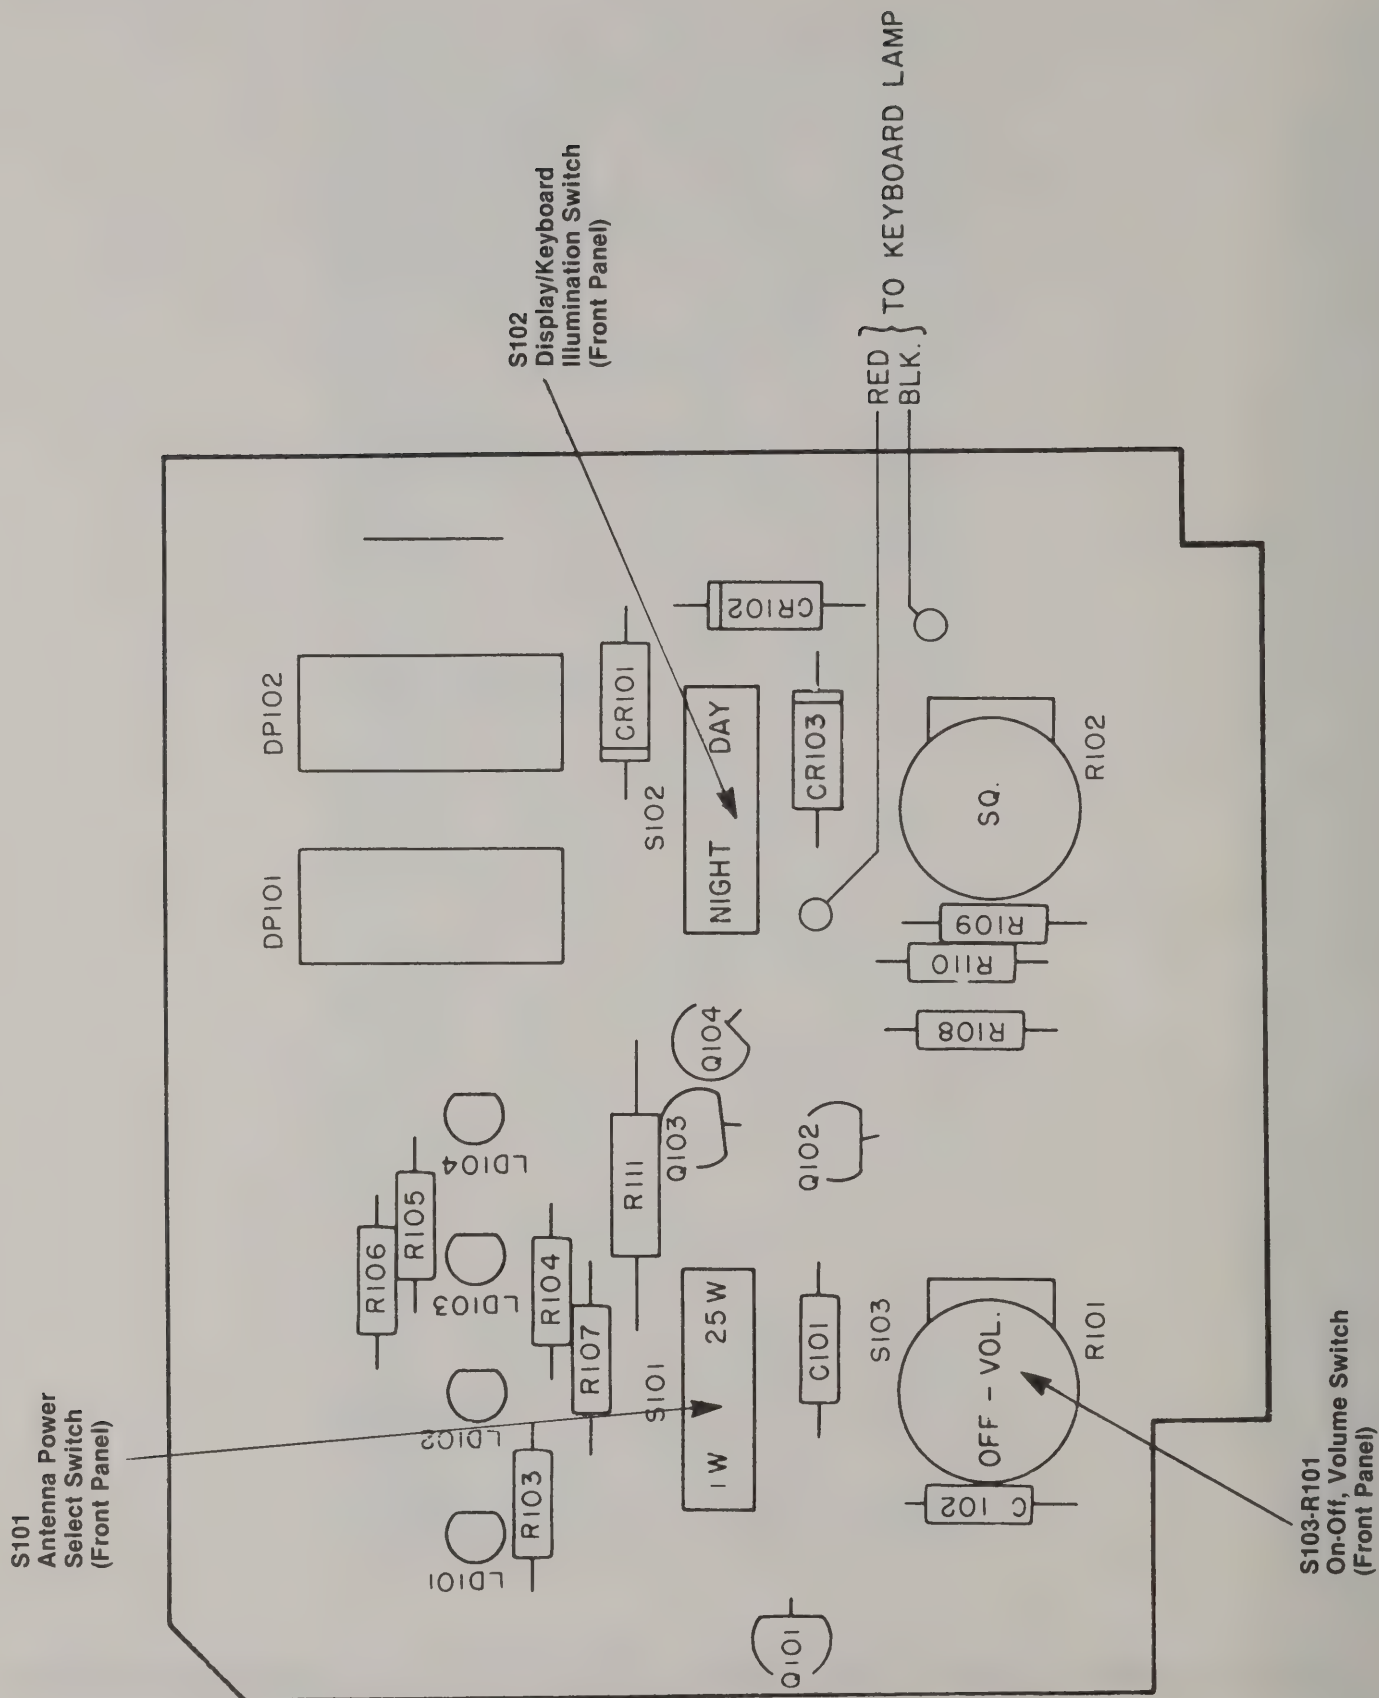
A. Parts Placement, Control PCB Assembly; Top View.
